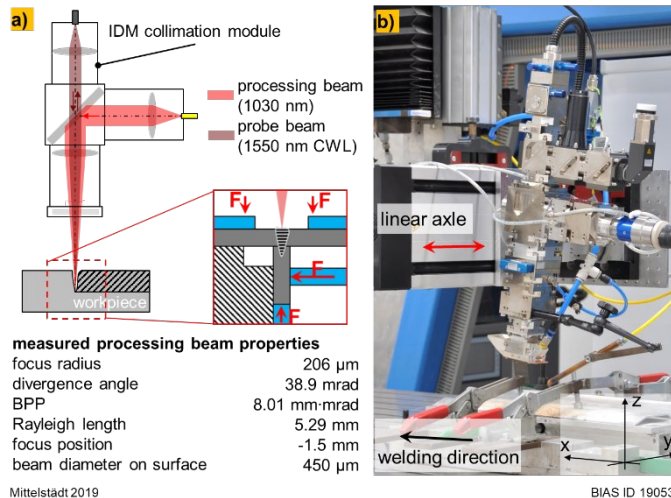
a) Schematic illustration of the optical beam paths; b) Picture of the set-up for welding hidden T-joints.
